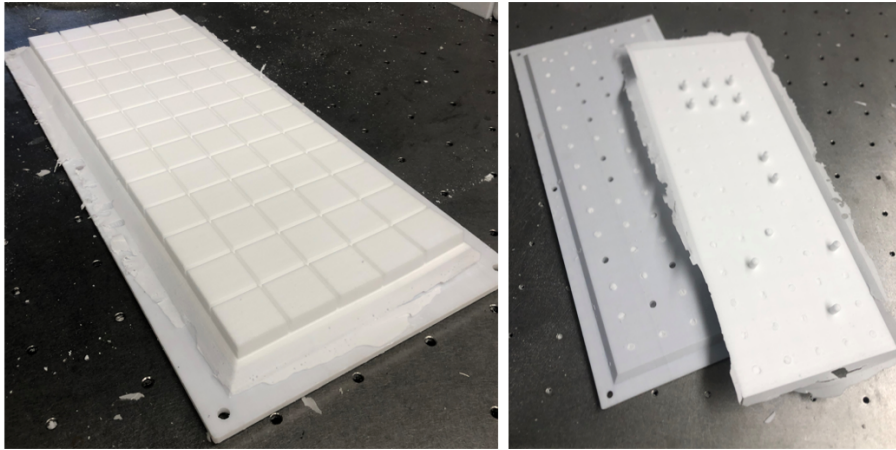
The excess material through the ventilation holes enabled the cast panel to attach to the lid surface and be easily removed from the mold.
